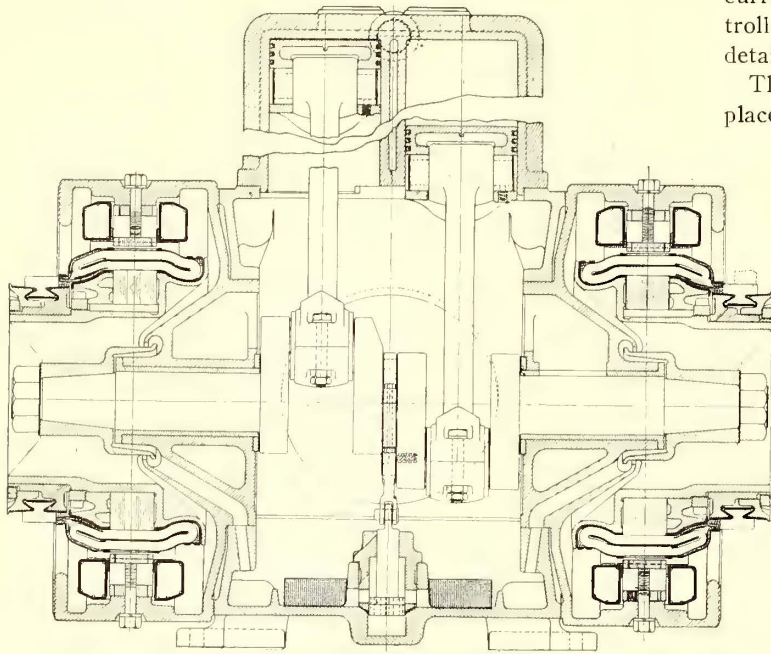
SECTION OF MOTOR AIR COMPRESSOR
